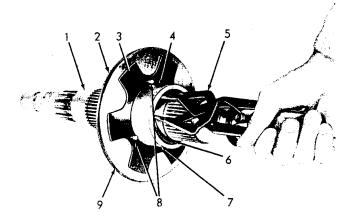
Removing Clutch Accelerator Piston Snap Ring (T-35088)
